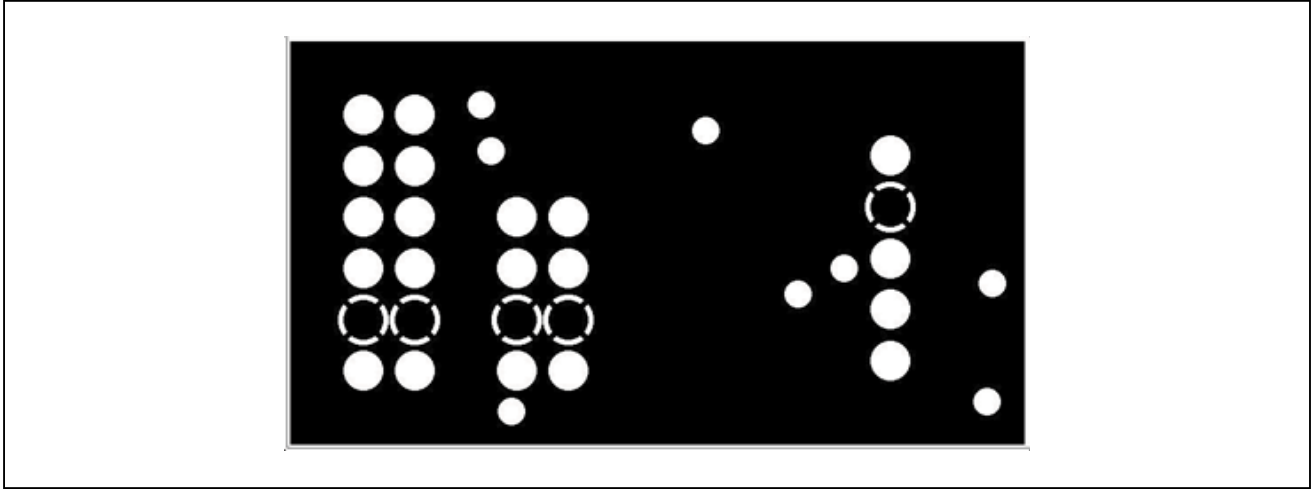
DS1086LPMB1 Peripheral Module PCB Layout—Inner Layer 2 (Power)
